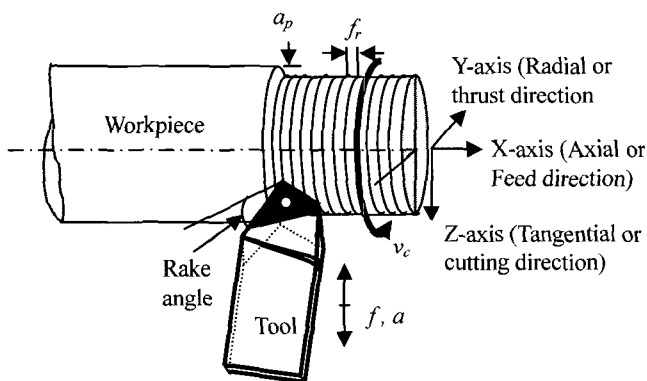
Schematic diagram of the tool-workpiece contact mechanism in the tangential UVC system
